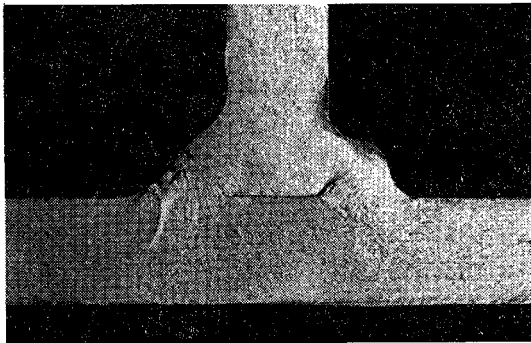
Fatigue Fracture Surface of HT-80 Welded beam with Internal Discontinuities.
